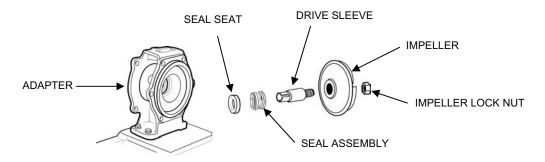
Drive Sleeve, Impeller, and Seal Assembly.
